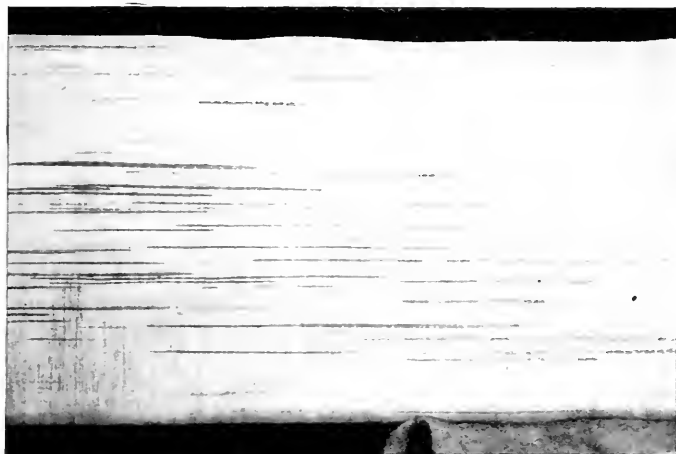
Longitudinal streaks in base of steel rail of early English manufacture.
